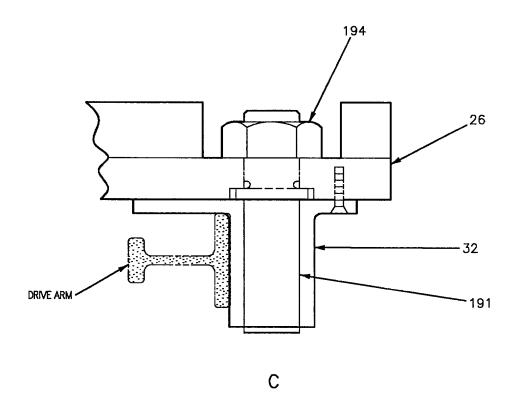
Outboard Drive Arm, 74A180740 (Sheet 3)
